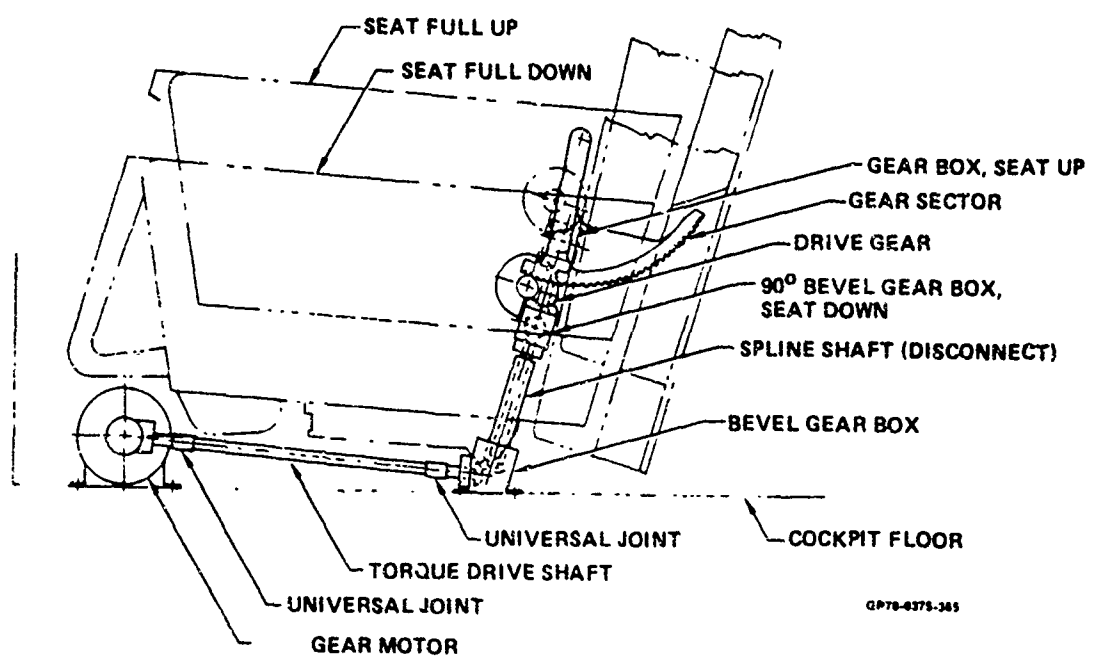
Aircraft Floor Mounted Positioning Gear Motor
